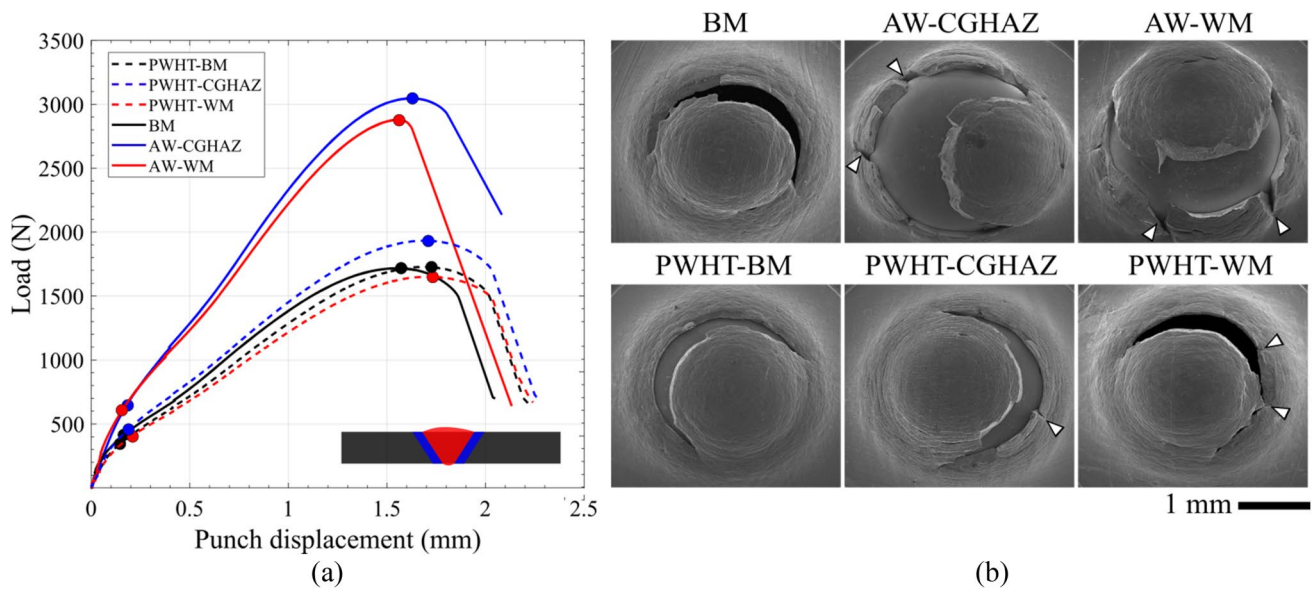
SPT results for AW and PWHT welds; a representative load–displacement curves fused to extract tensile parameters; b fracture surfaces of SPT specimens showing failure morphology
